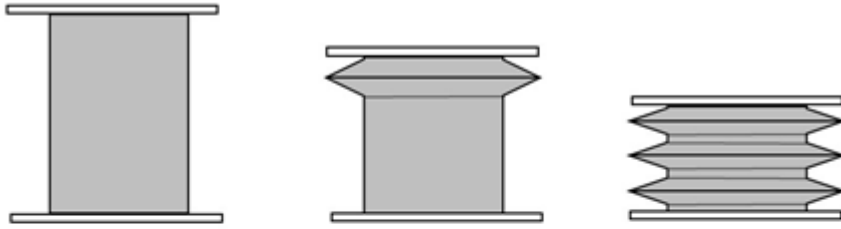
Extrusion molding method and molded article shape⁶⁸⁾
